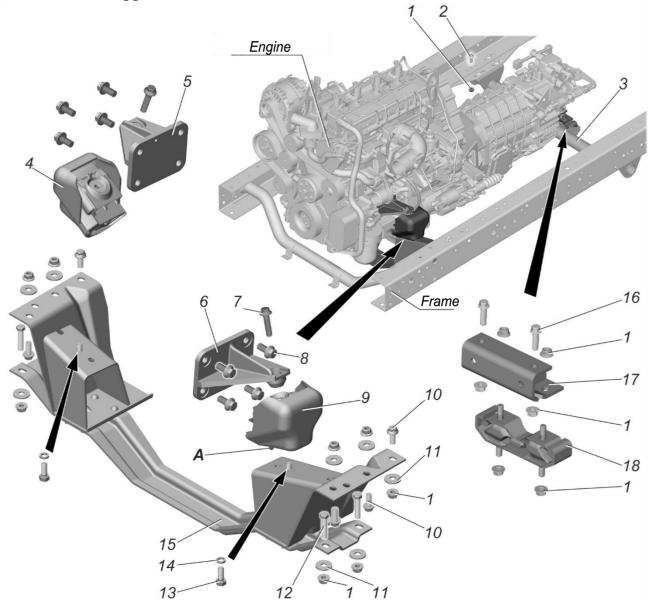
Engine suspension: 1 – nuts; 2, 7, 8, 10, 12, 16 – bolts: 3 – rear engine support crossmember; 4 – front pad RH; 5, 6 – engine brackets; 9 – front pad LH; 11, 14 - washers; 13 – screw; 15 – front engine suspension cross-member; 17 – rear bracket; 18 – rear pad;
